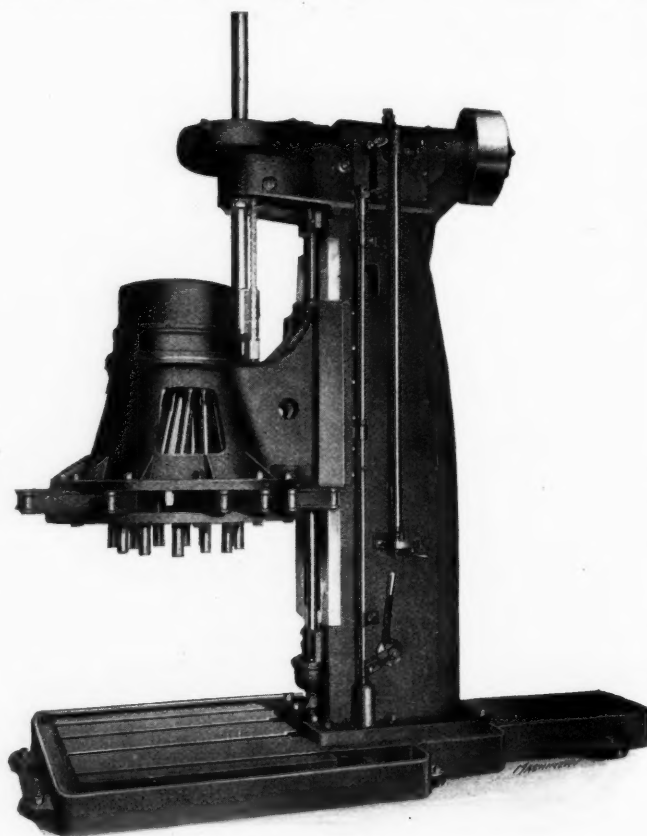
Harrington No. 72 Multiple Spindle Drilling Machine
